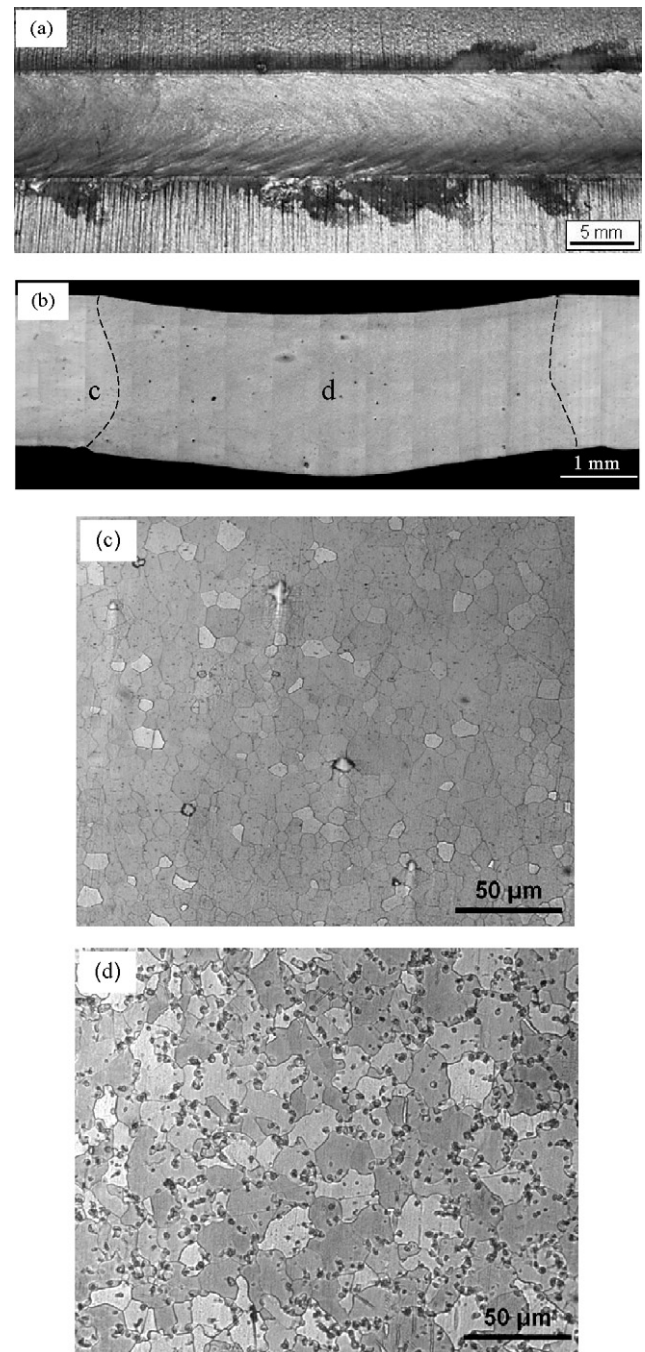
Typical macroscopic and microscopic structures of a double-sided arc welded AZ31-H24 alloy. (a) Top weld bead surface, (b) cross-section of the welded joint, (c) heat-affected zone (HAZ), and (d) fusion zone (FZ).
